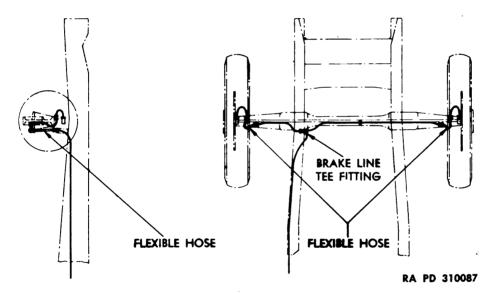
Arrangement of Brake Lines at the Front Axle on 6 x 4 Models
